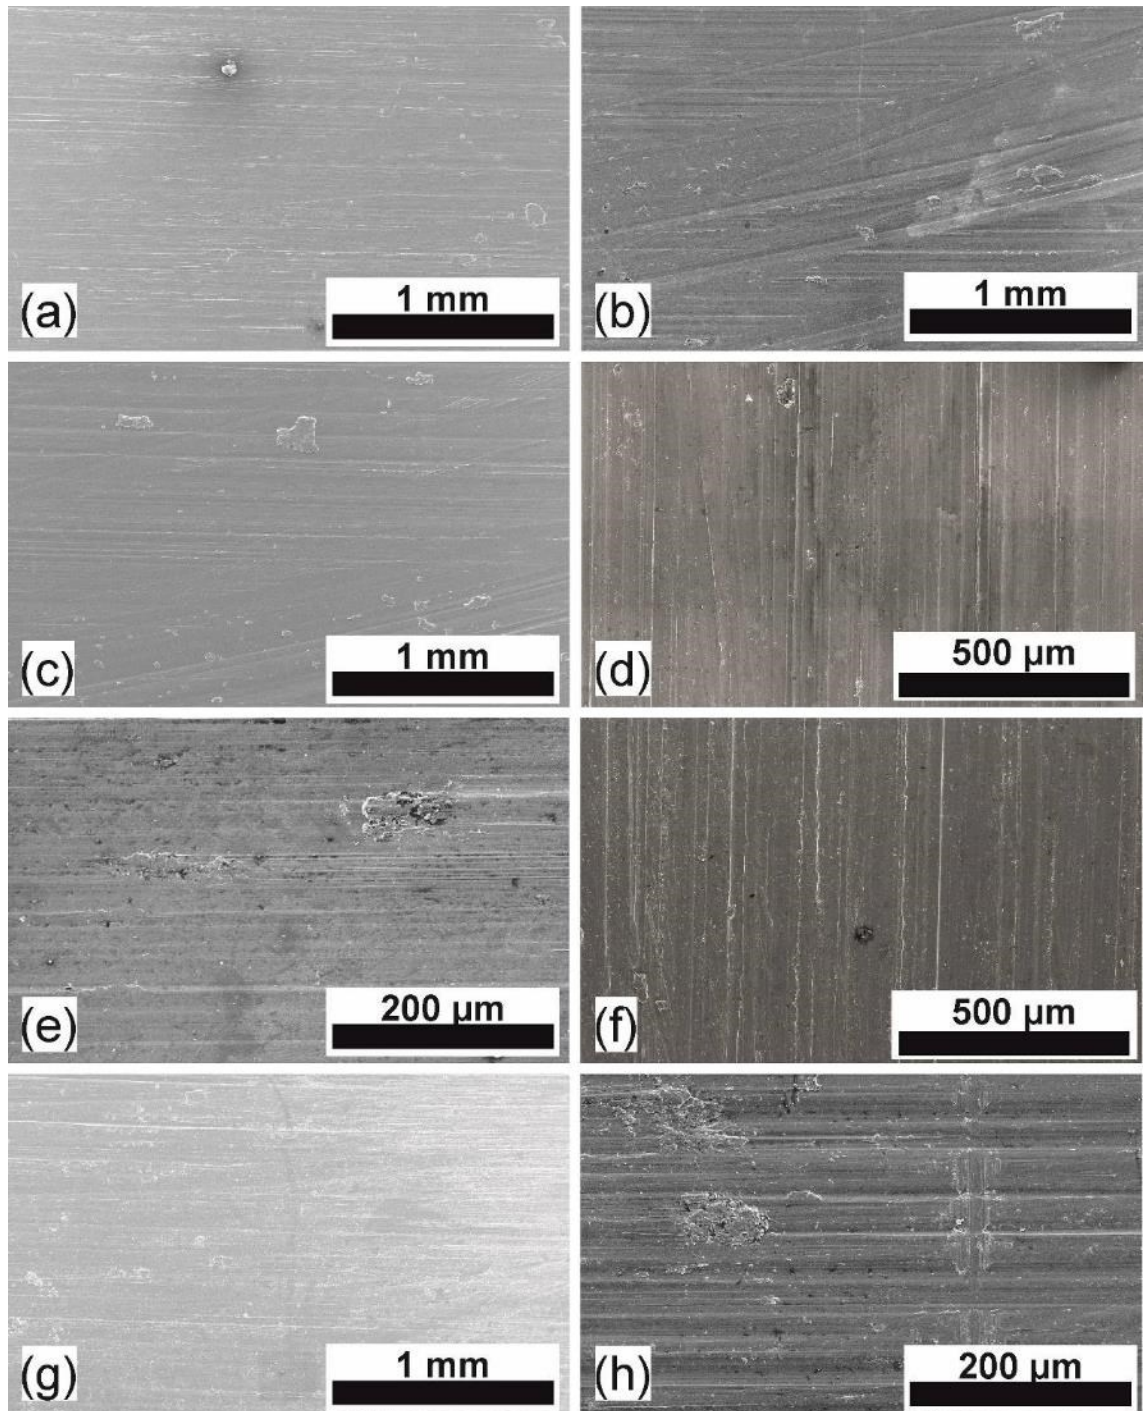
Machined surfaces; a) Specimen 1 @ 127836 cycles; b) Specimen 2 @ 72559 cycles; c) Specimen 3 @ 100113 cycles; d) Specimen 4 @ 181525 cycles; e) Specimen 5 @ 1238187 cycles; f) Specimen 6 @ 142887 cycles; g) Specimen 7 @ 135770 cycles; h) Specimen 8 @ 945223 cycles.
